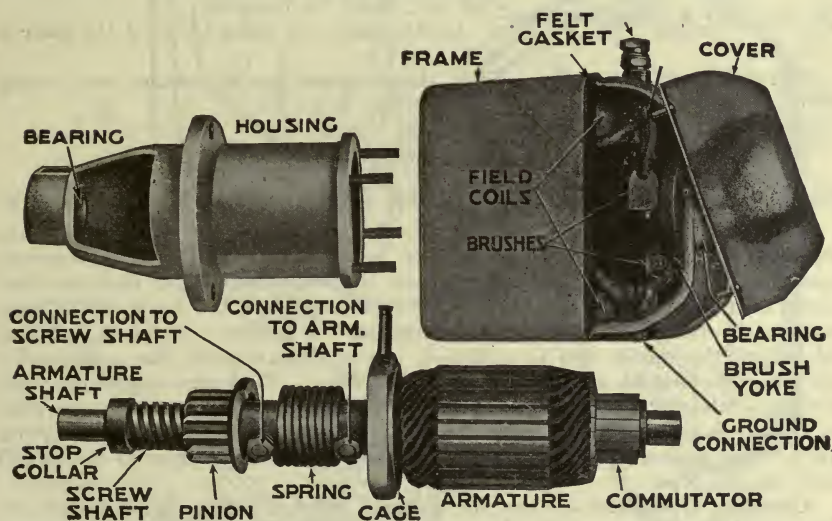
Gray & Davis Motor Parts. Outboard Automatic Pinion Shift Type.
